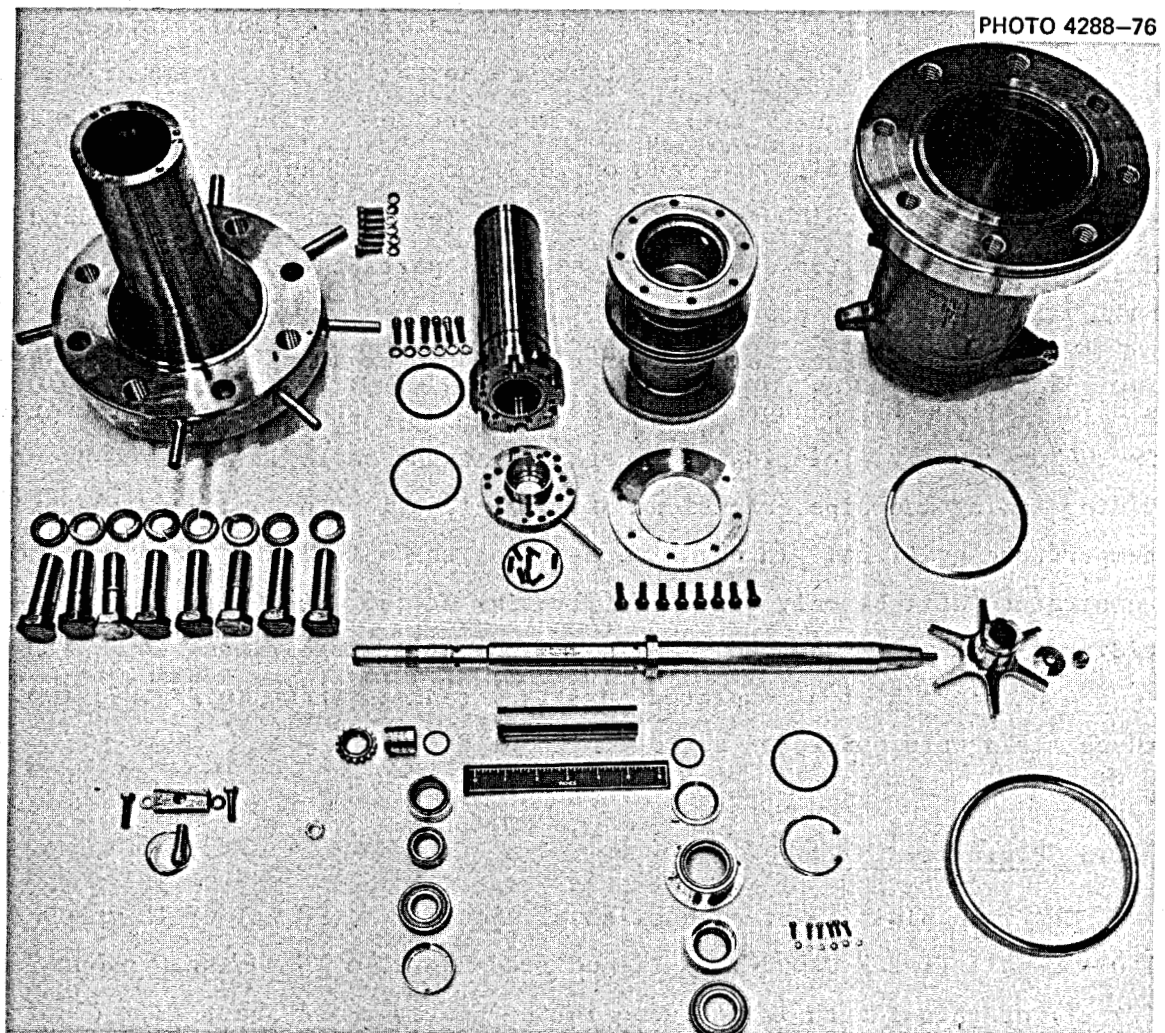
Exploded view of the ALPHA salt pump rotary assembly and pump tank.
